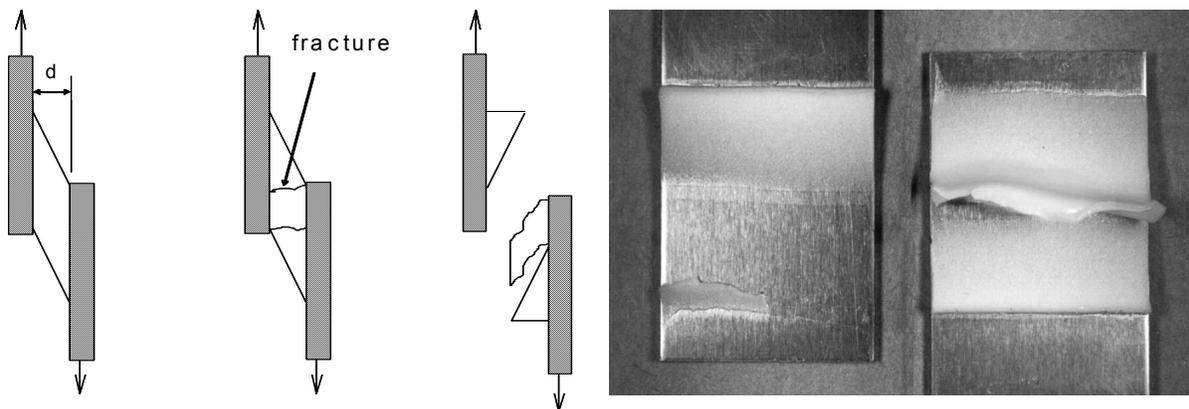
Bond failure under excessive shear due to cohesive fracture of the adhesive
